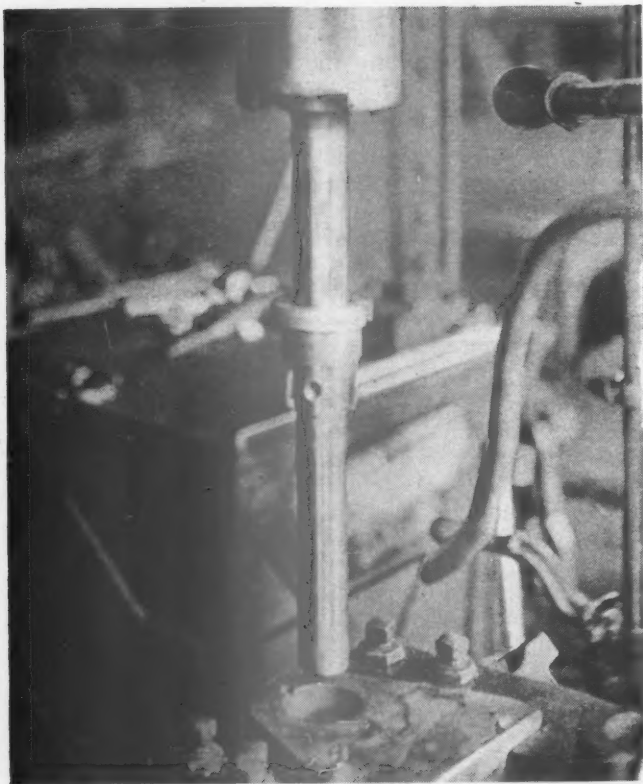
Special boring jig used in reclaiming brake beam struts with worn live truck lever holes
